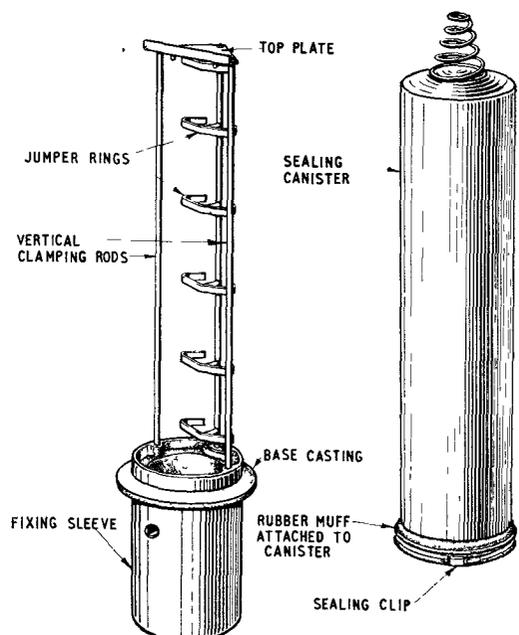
PILLAR MOUNTINGS FOR ASSEMBLIES
